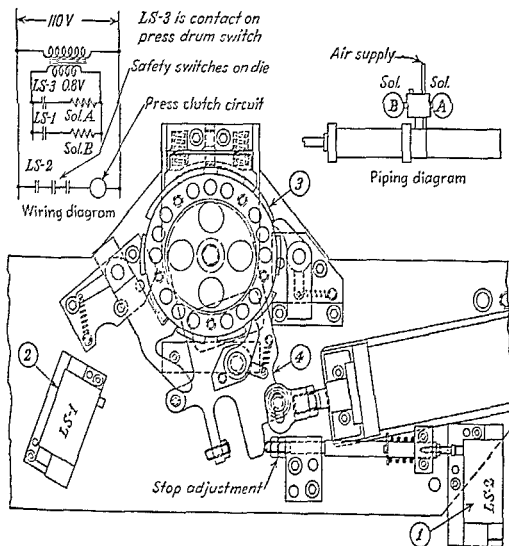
Indexing dial. (Courtesy of the Die Casting Industry, Inc.)
